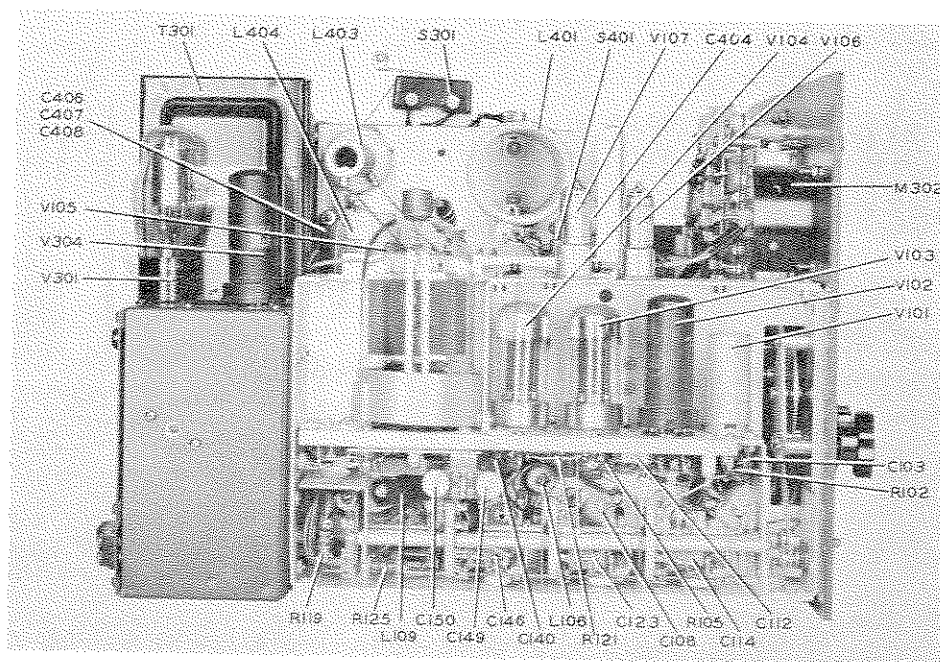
32V-2 Parts Arrangement - Left Side Open
